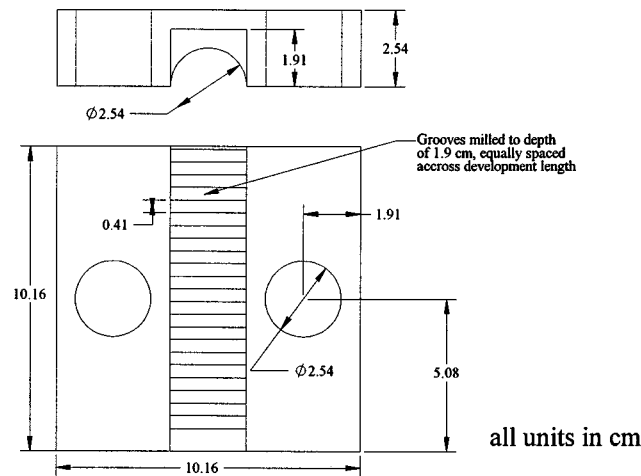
Detail drawing of pilot grip for use with Grade 60, #16 rebar
